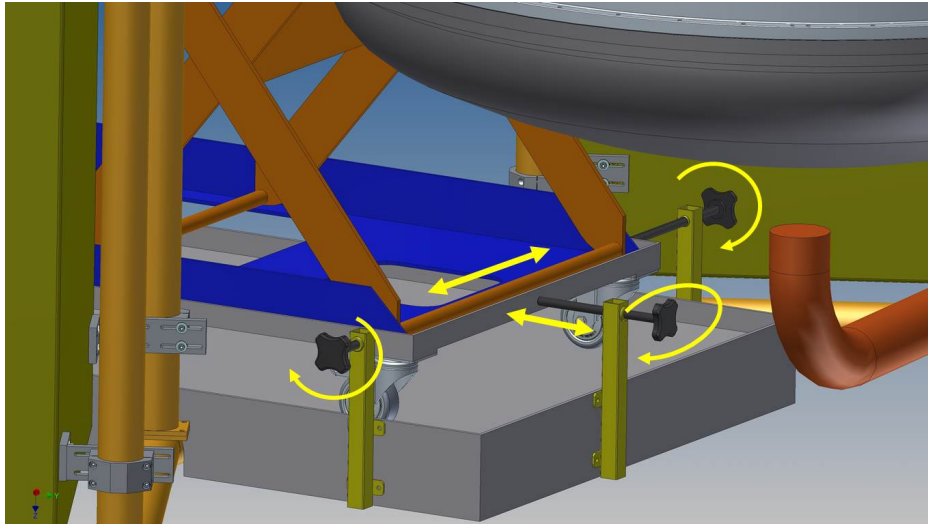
Concept for manual (fine) adjustment of the Handling Tool position
